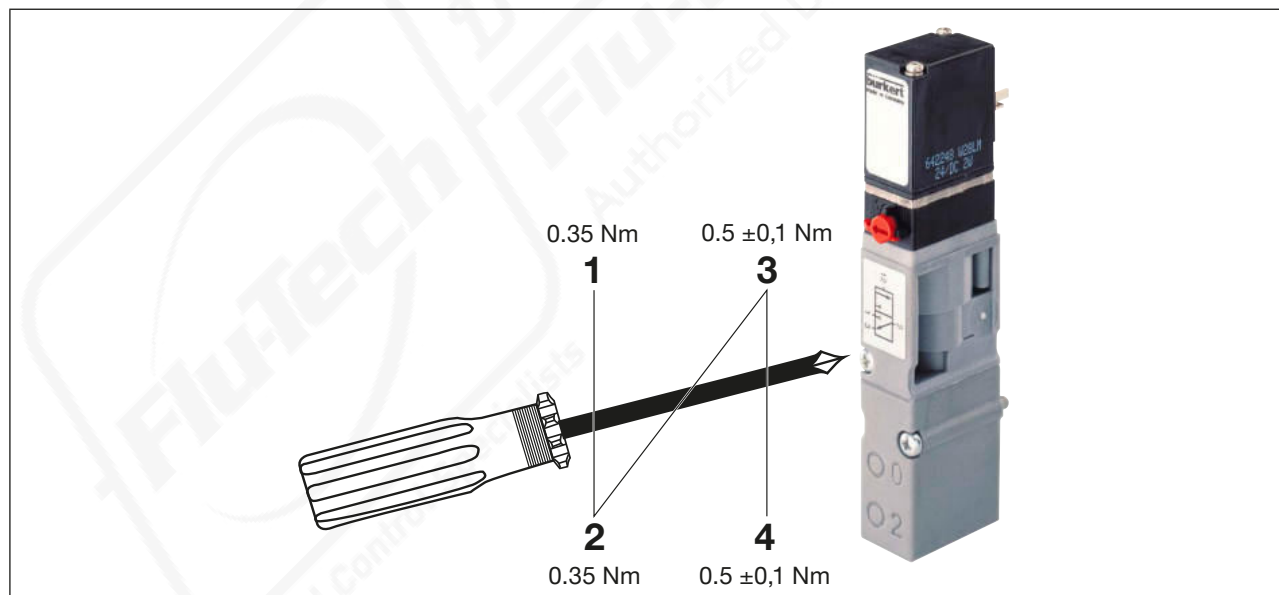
Tightening the screws when replacing valves Type 6526 and Type 6527
